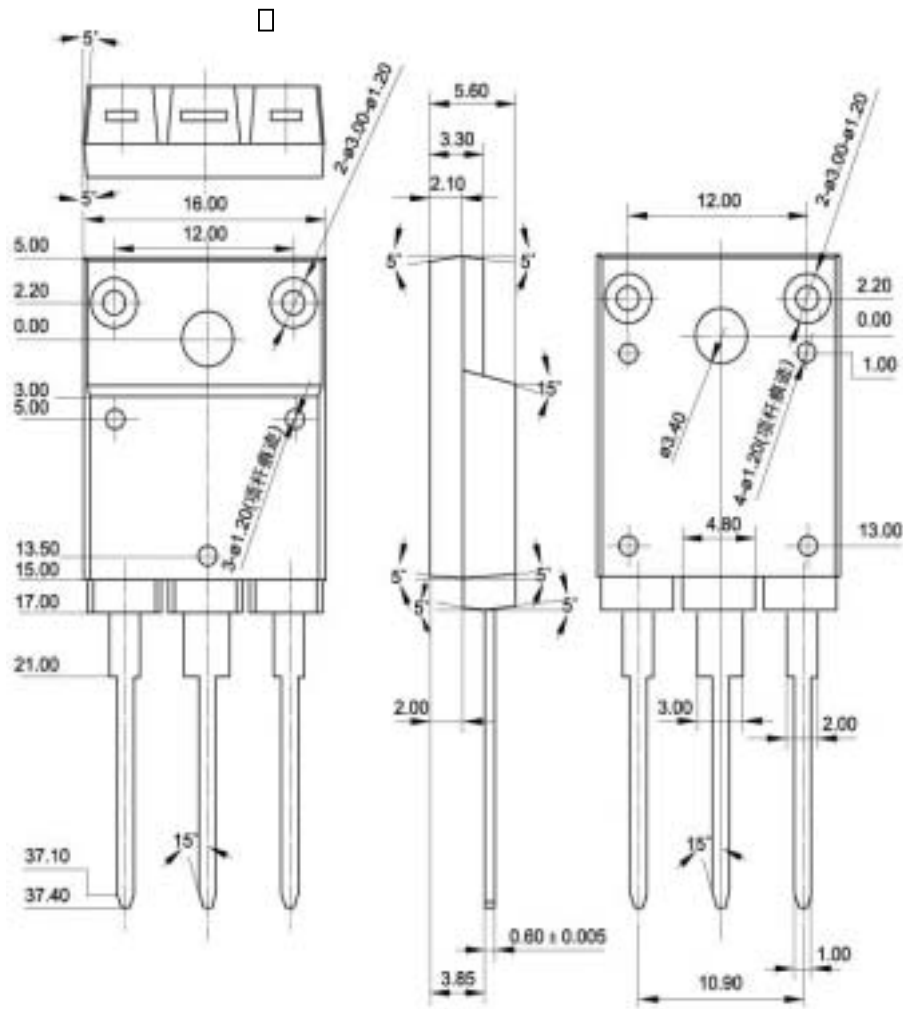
Outline dimensions (unindicated tolerance: ± 0.15 mm)
